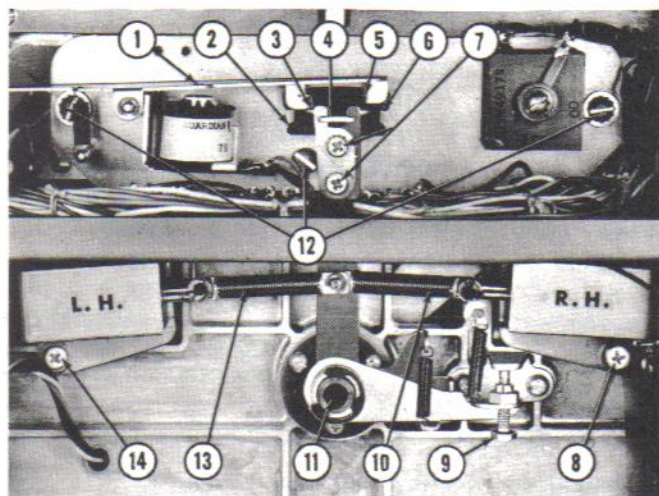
ROTATING PLATE AND ROCKER ARM ADJUSTMENT - 2510
